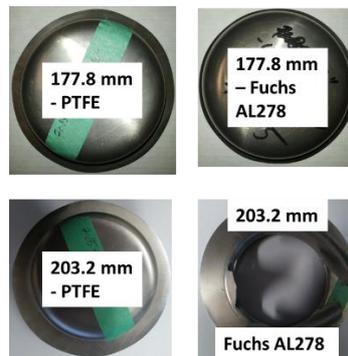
Deep drawn cups drawn under a binder load of 20 kN, and lubricated using either Fuchs AL278 or PTFE spray.
